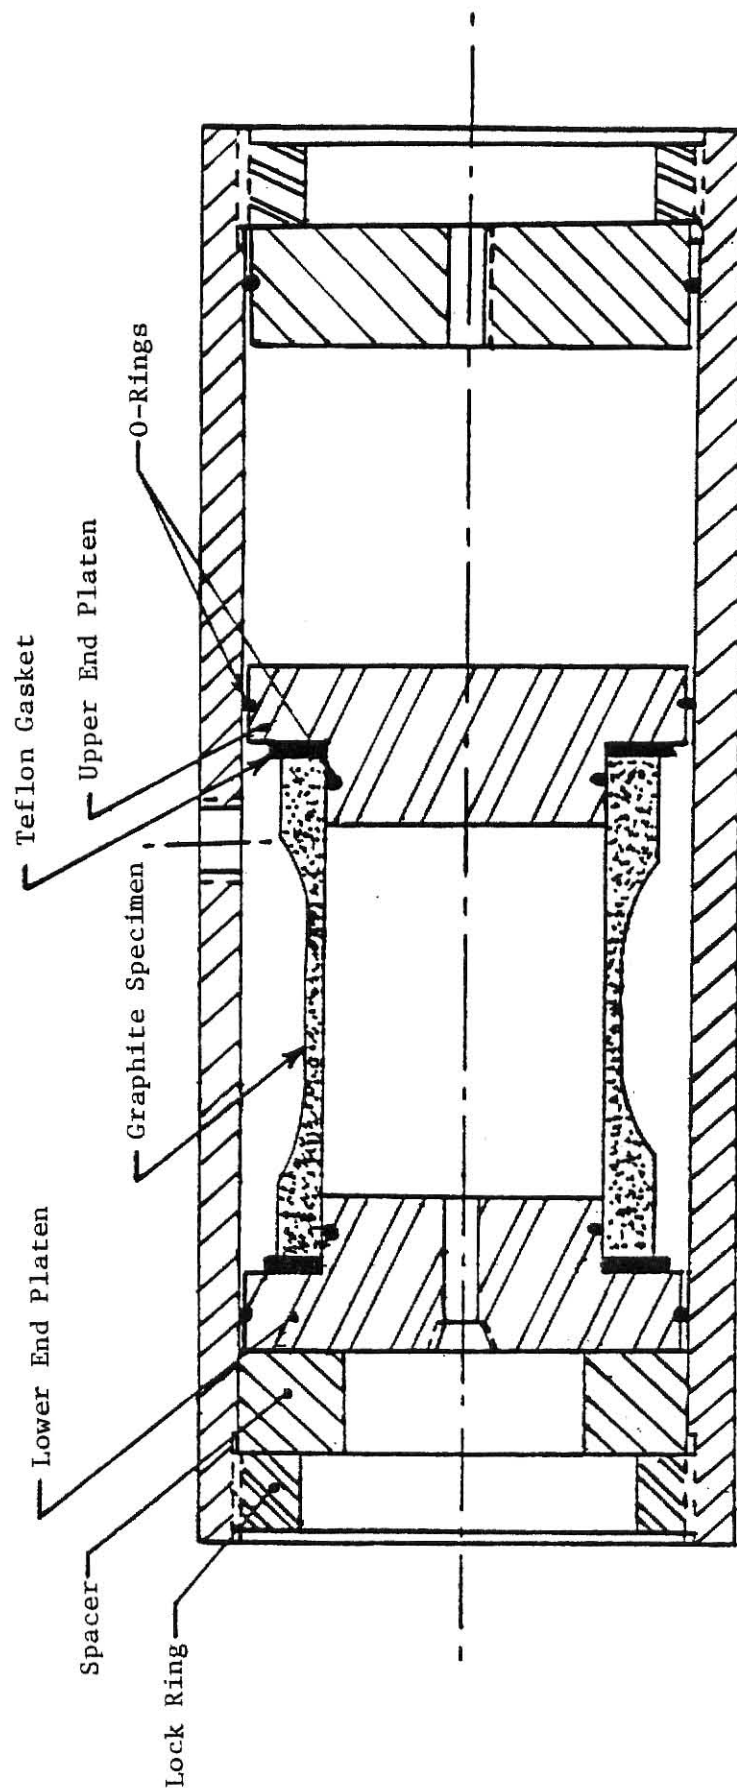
Assembled Biaxial Test Apparatus with C-C Test Specimen
